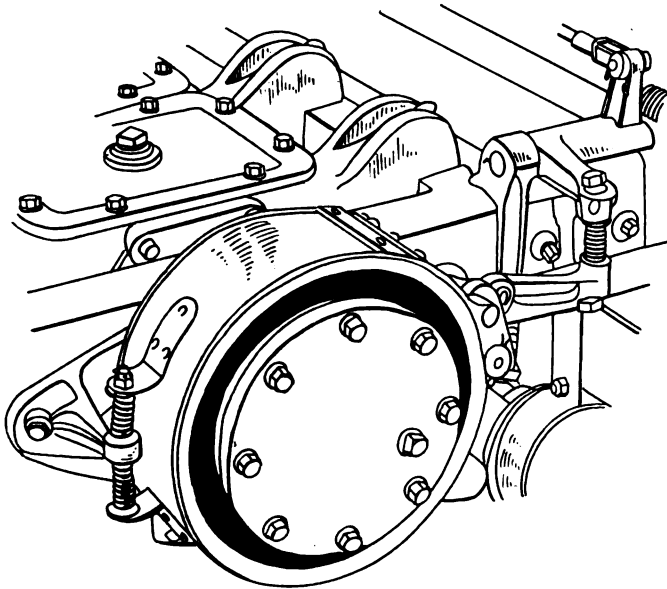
BRAKE EMPLOYED ON A FOUR-WHEEL-DRIVE TRUCK
